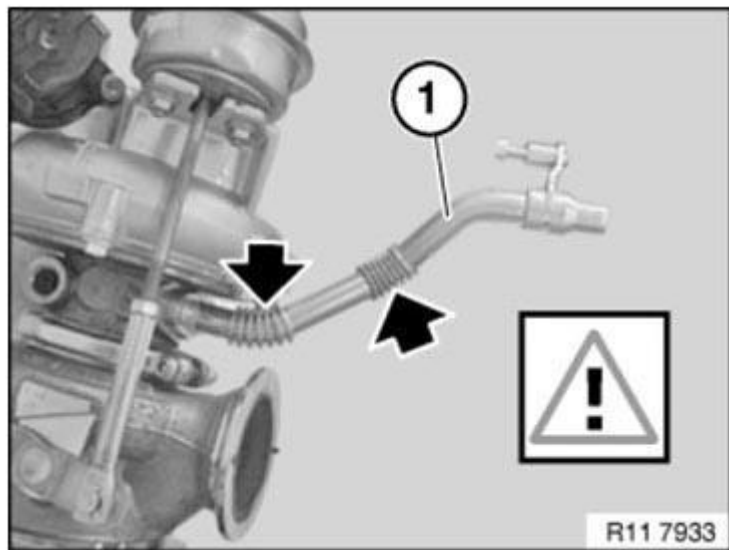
Identifying Thermal Linear Compensators On Oil Return Pipe
